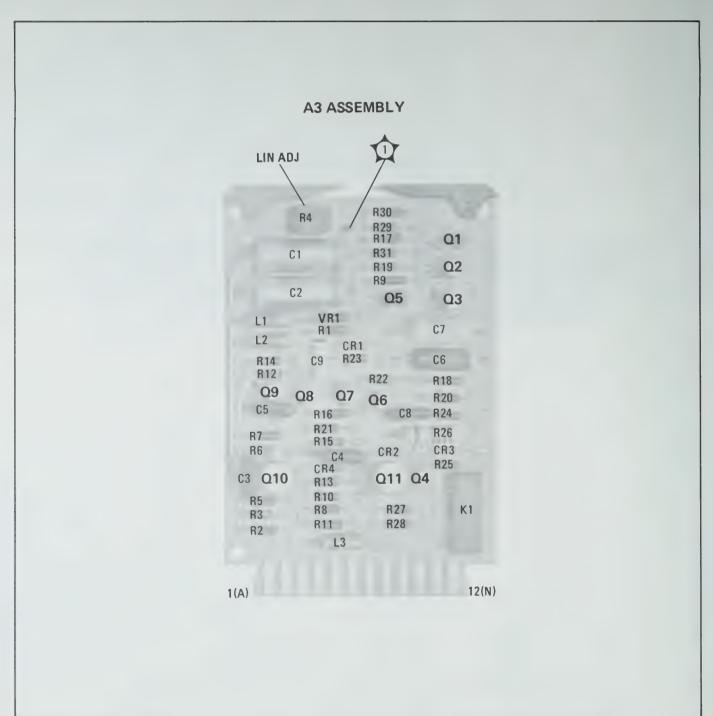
A3 ALC Amplifier Assembly Component and Test Point Locations
